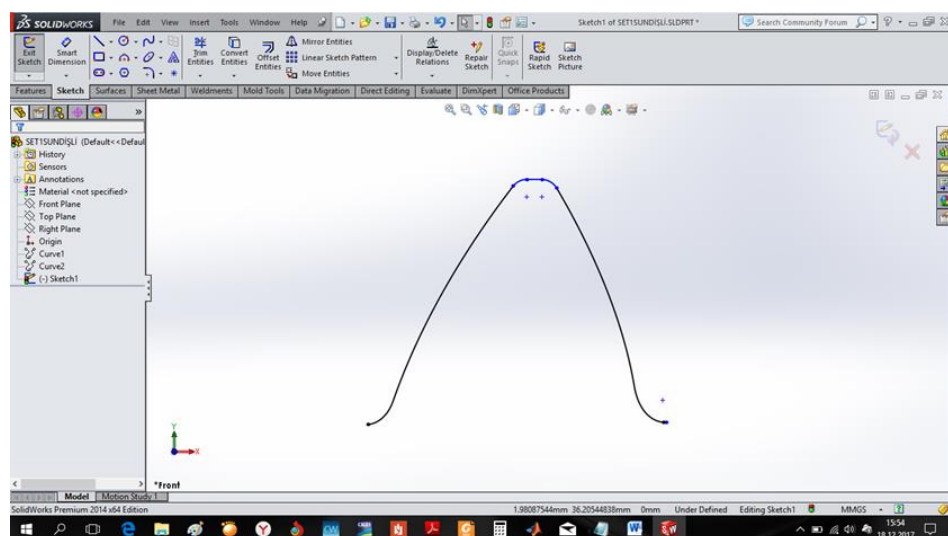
Tooth profile of sun gear drawn in SolidWorks
